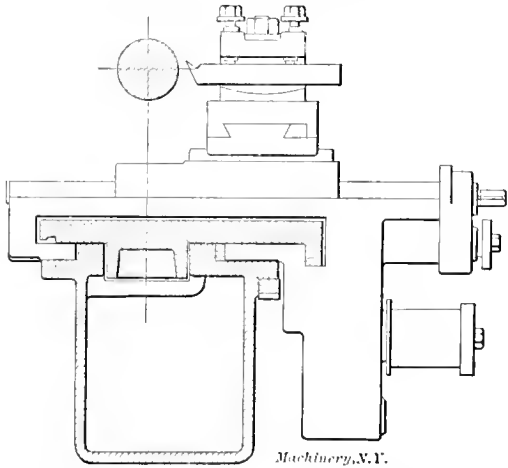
Cross-section of George Richards High-speed Lathe, shown in Fig. 1, showing Construction which protects Bearings of Bed and Carriage from Chips.
